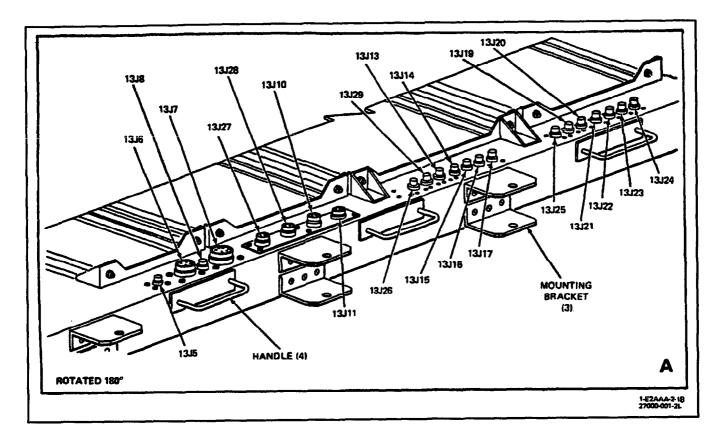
Removal and Installation of Electrical Equipment Rack MT-4824/APS-125 and MT-6249/APS-138 (Sheet 2)
